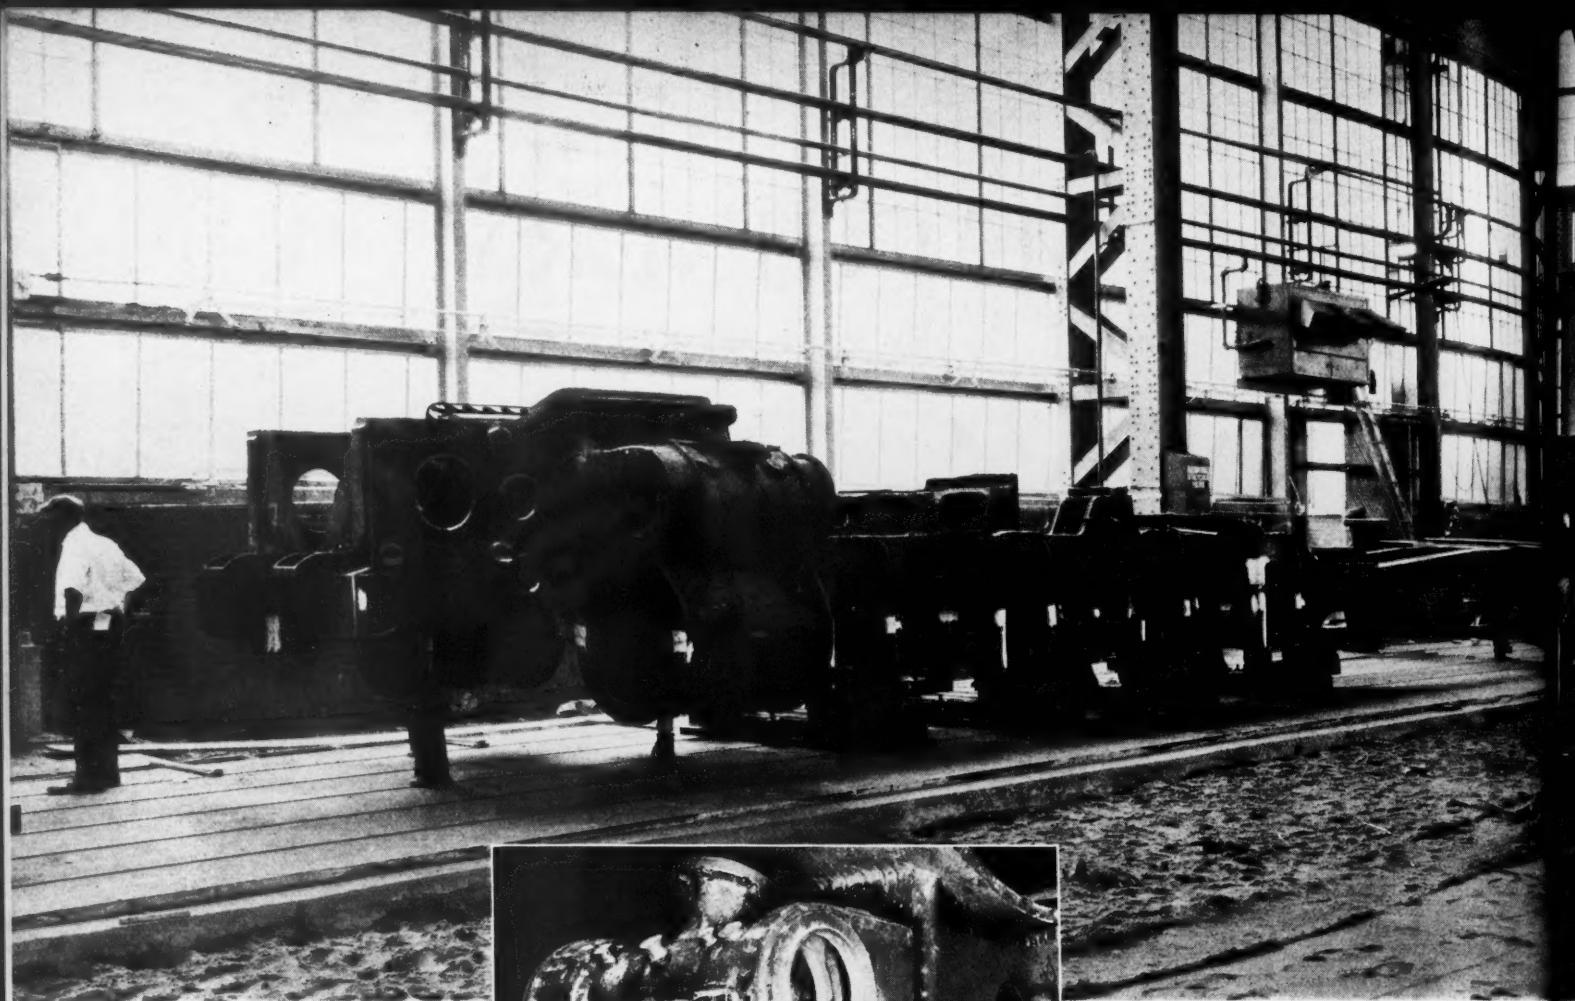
The Locomotive Bed Castings are Set up on Jacks and Special Fixtures for Laying out before Machining
